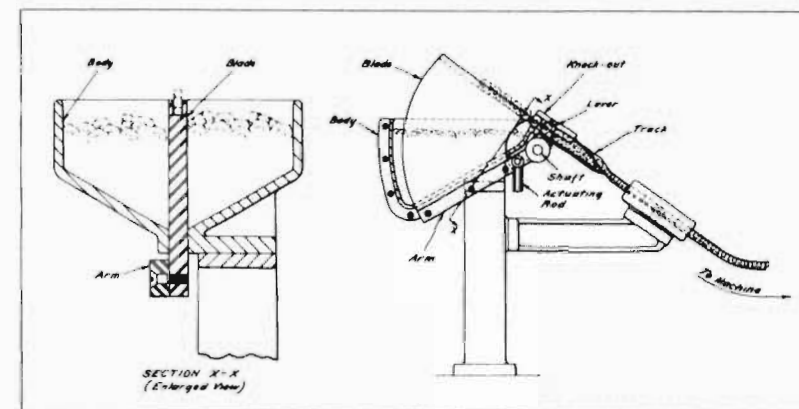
Centerboard type of hopper and separator mechanism for feeding properly positioned nuts to an automatic machine.
